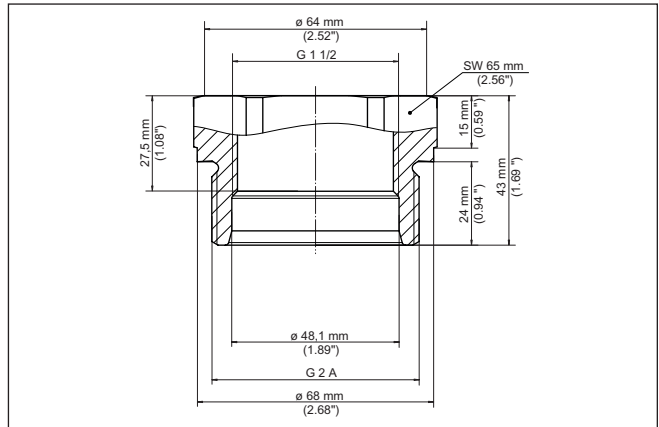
Dimensions of threaded adapter G1½ (DIN 3852-X) on thread G2 (DIN 3852-X)
